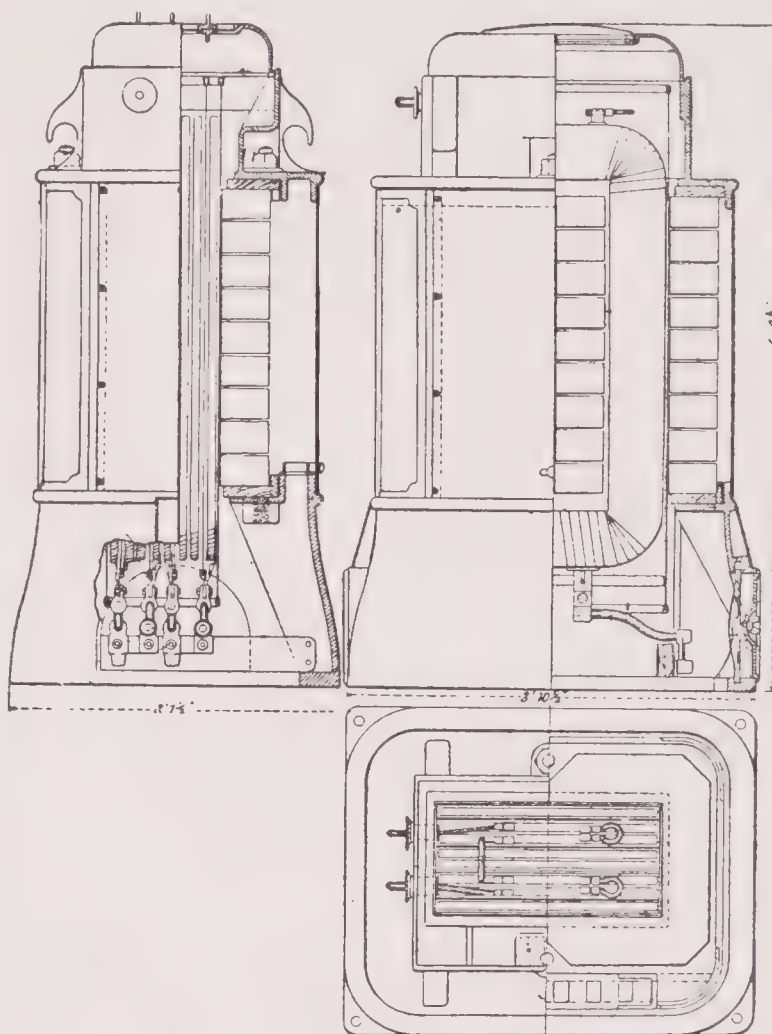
CENTRAL LONDON RAILWAY: NOTTING HILL GATE SUB-STATION. 300-K.W. TRANSFORMER, ELEVATIONS AND PLAN.
